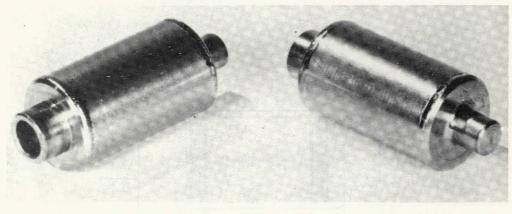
Components for typical fuel-element specimen (LT-6) prior to assembly.
